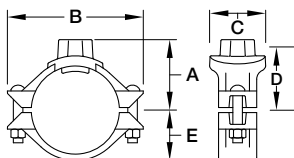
MECHANICAL CROSS THREADED OUTLET
